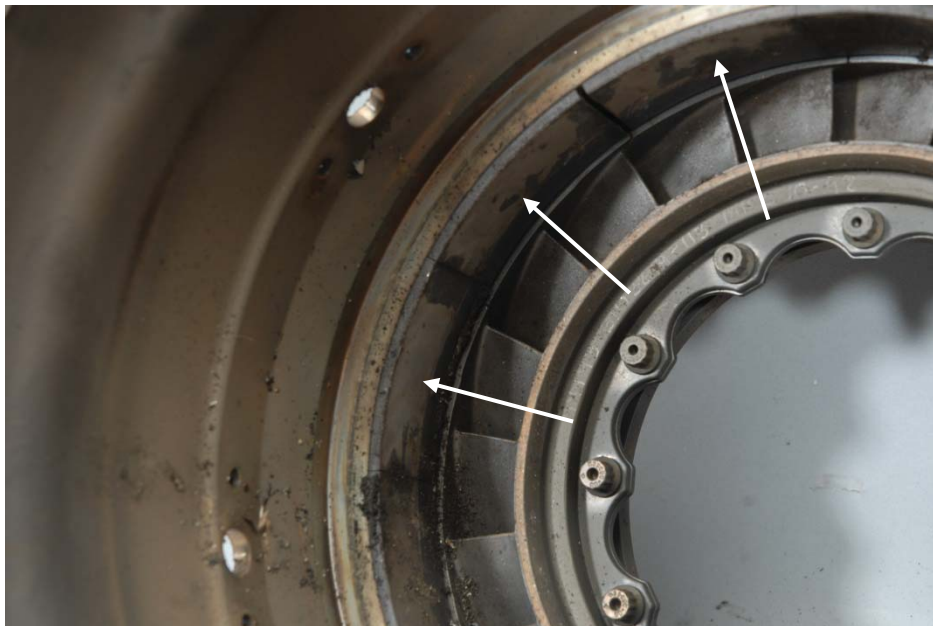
P-79001C, First-Stage Turbine Stator Assembly, ALF
